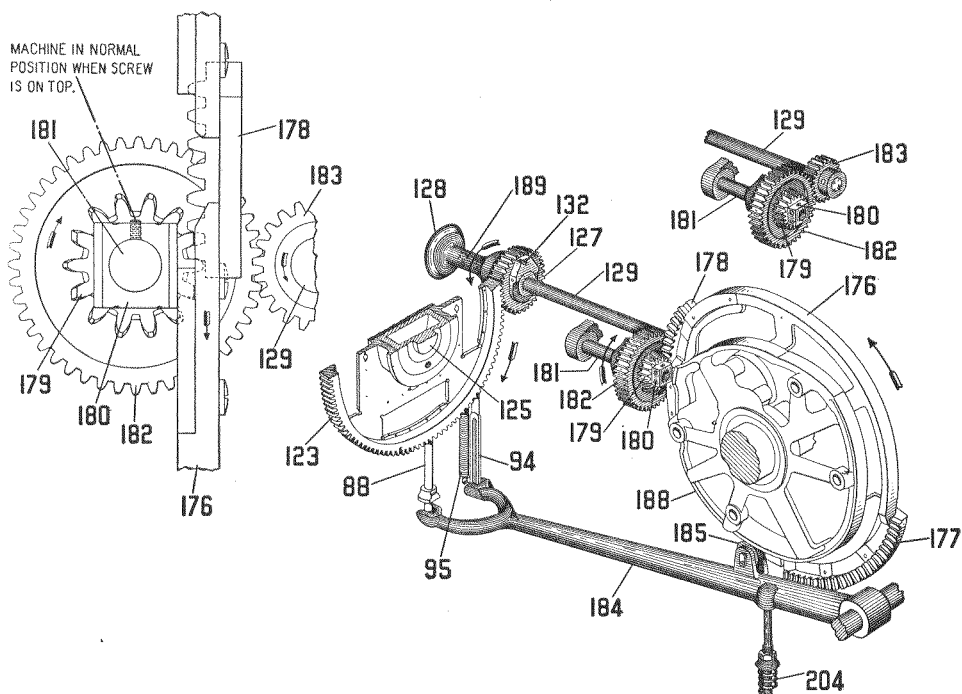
View showing the mold-turning and justifying cam and the method by which the mold disk is revolved and held in position at the points of casting and ejection. 176 is the cam casting, 177 is the long segment and 178 the short segment. These segments 177 and 178 are portions of a circular beveled gear and are fastened to the cam casting 176. These segments in the revolution of the cam at certain parts of the revolution engage with the beveled pinion 179.
